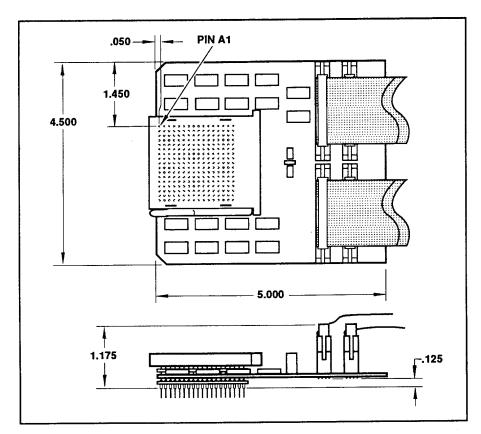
shows the dimensions of and minimum clearances for the target head.
